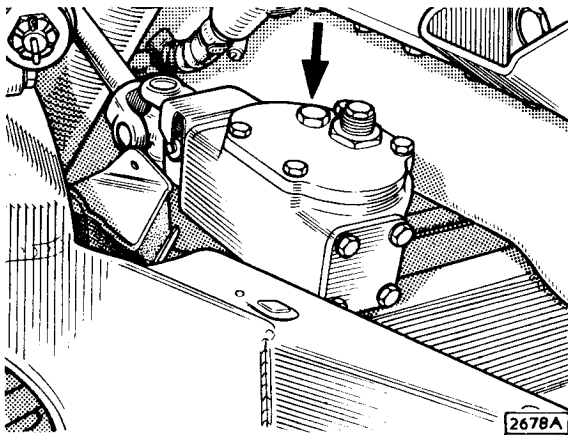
Steering Box Filler Plug (R.H.D.)
